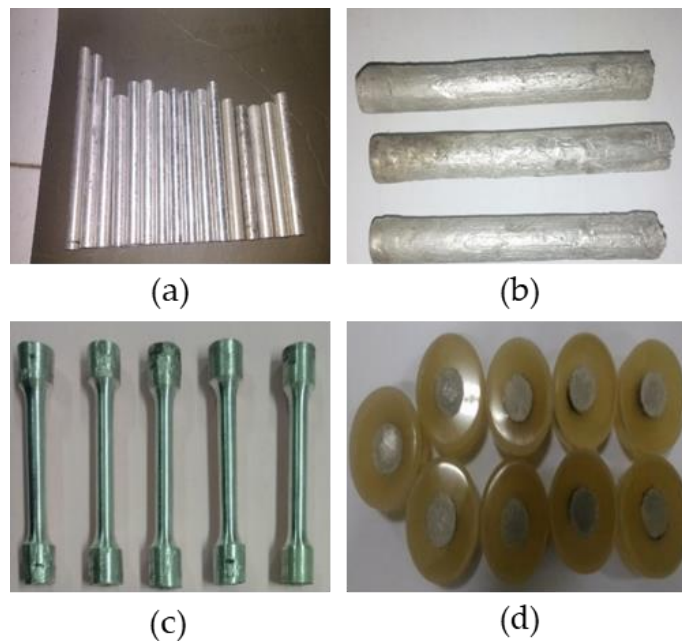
The flow of specimen making: (a) Initial material (b) Squeeze Casting Results (c) Tensile Test Specimen (d) Hardness Test Specimen.
